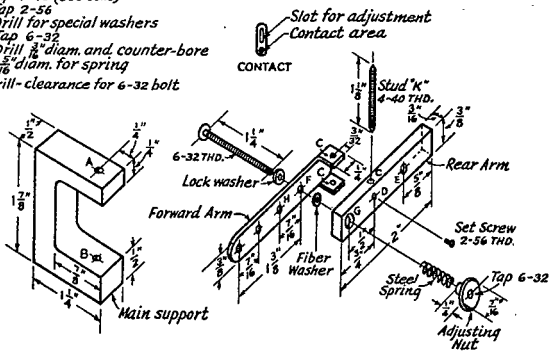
An exploded view of the key mechanism, giving dimensions and details. Two contacts are mounted at Hole H, one on each side of the forward arm (center contact of S_1 , Fig. 1). One contact is mounted at Hole E and insulated by fiber washers (single contact of S_1 , Fig. 1). An adjusting screw forming the upper pivot for Stud K is made from an 8-32 screw, and a lock nut should be provided.
